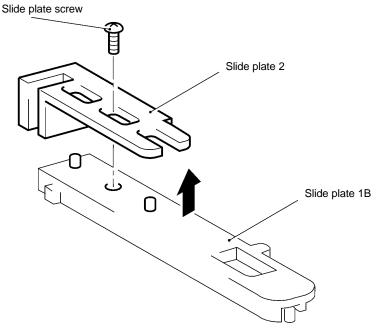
Disassembling the Dial Switch Holder Assy B (3)
